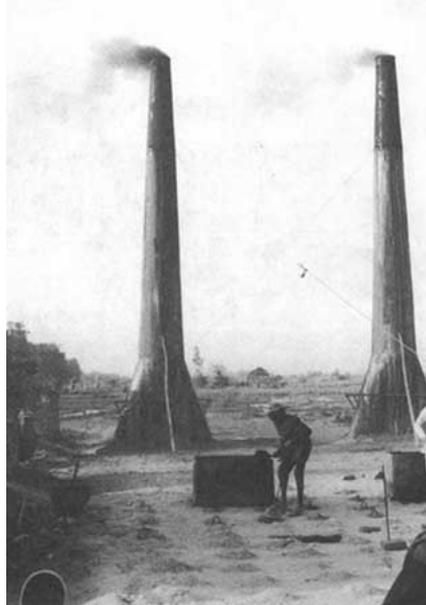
Bull's Trench kiln: chimney and feeding (India)
